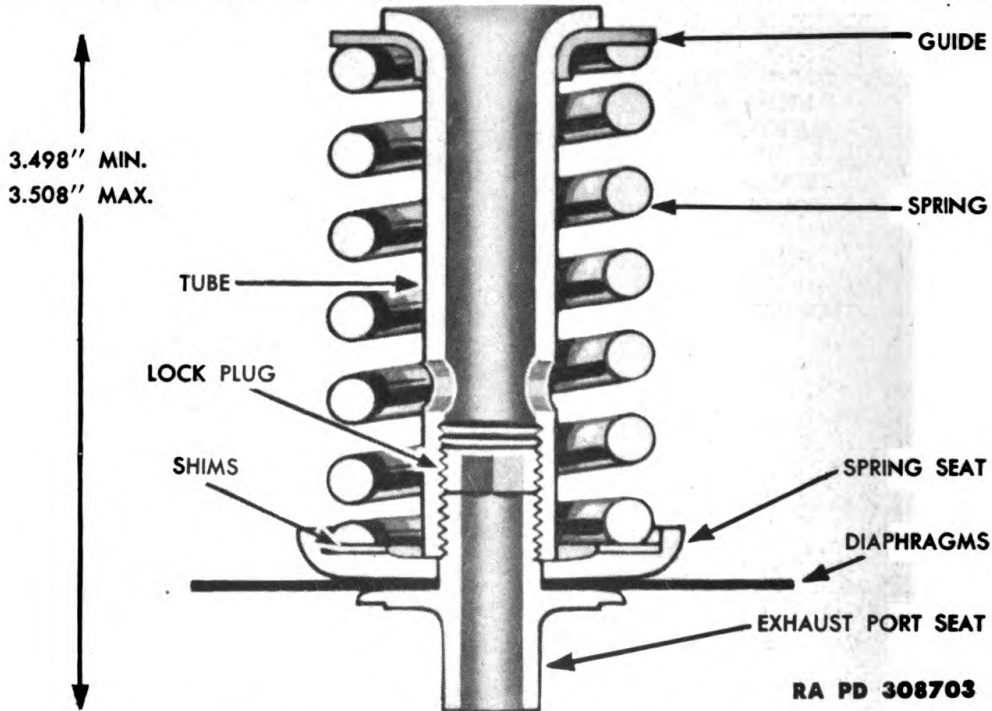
Pressure Regulating Spring and Diaphragm Assembly
